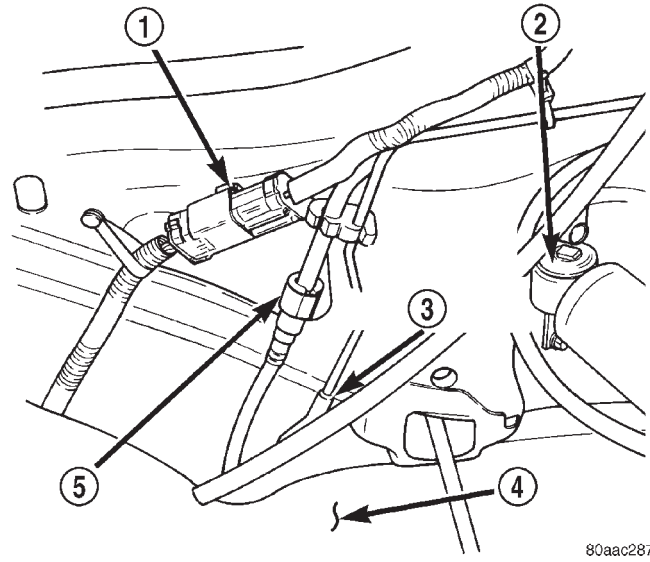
Fuel Tank Connections at Front of Fuel Tank
